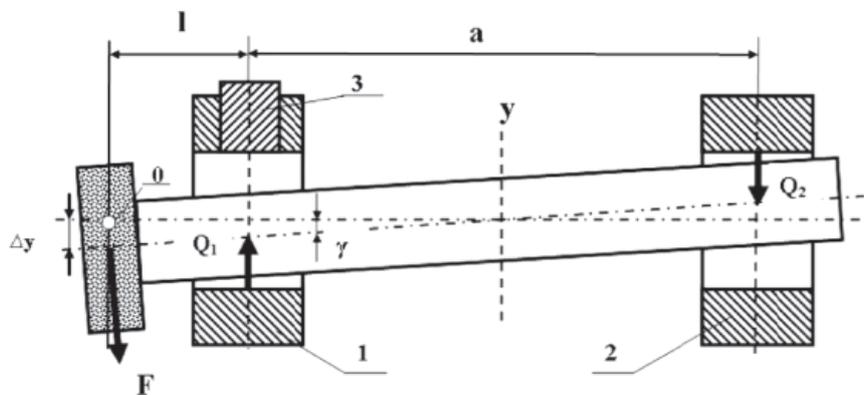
The SU scheme to mount the grinding wheel on the spindle bracket:
